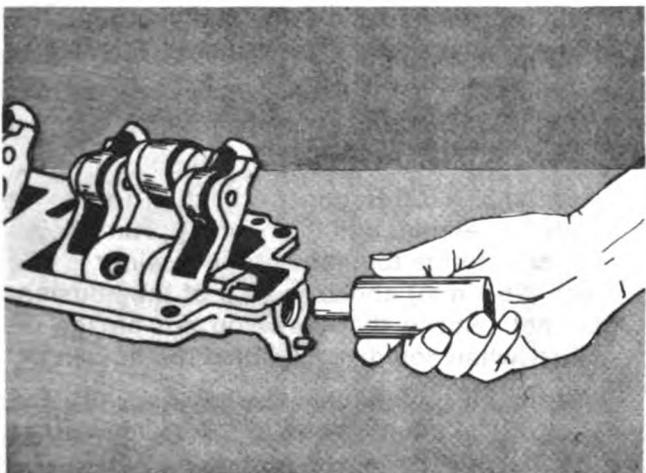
Use The 3376185 Tool To Adjust The Shaft.
